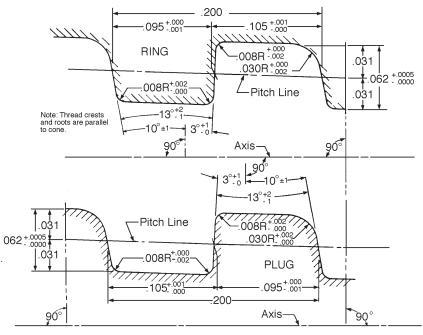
Gauge Thread Form for Line Pipe and Round Thread Casing and Tubing (See Tables 24 and 25 for dimensions.)
